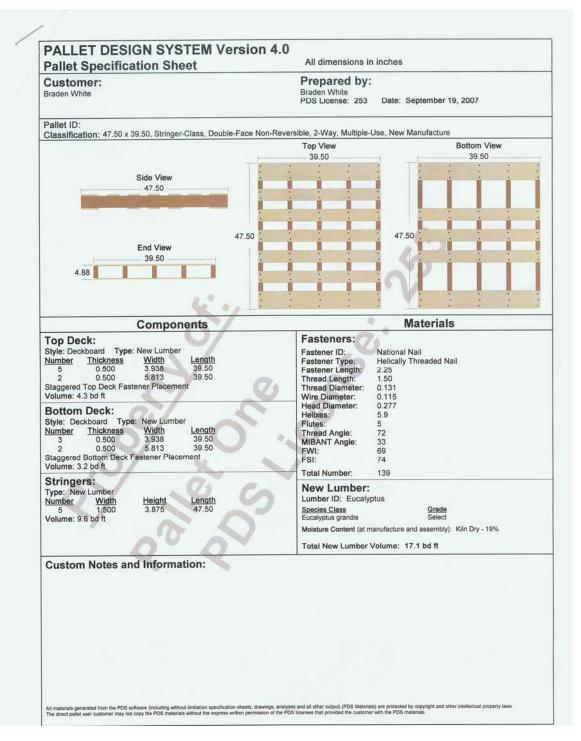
Light duty 5 stringer pallet design details (used with permission of PalletOne).
